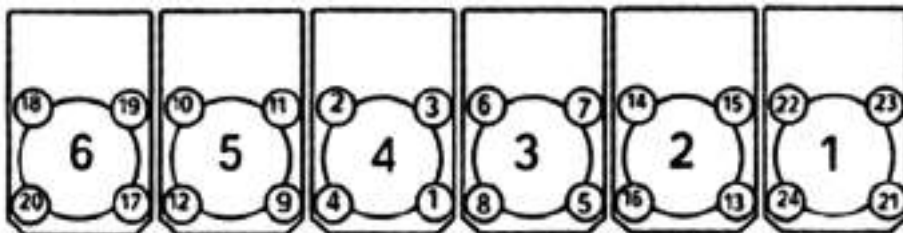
Main Bolt Tightening Order of Cylinder Head
